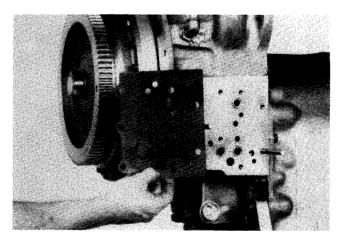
Install aligning studs to facilitate control valve assembly. Install new control valve gasket.
